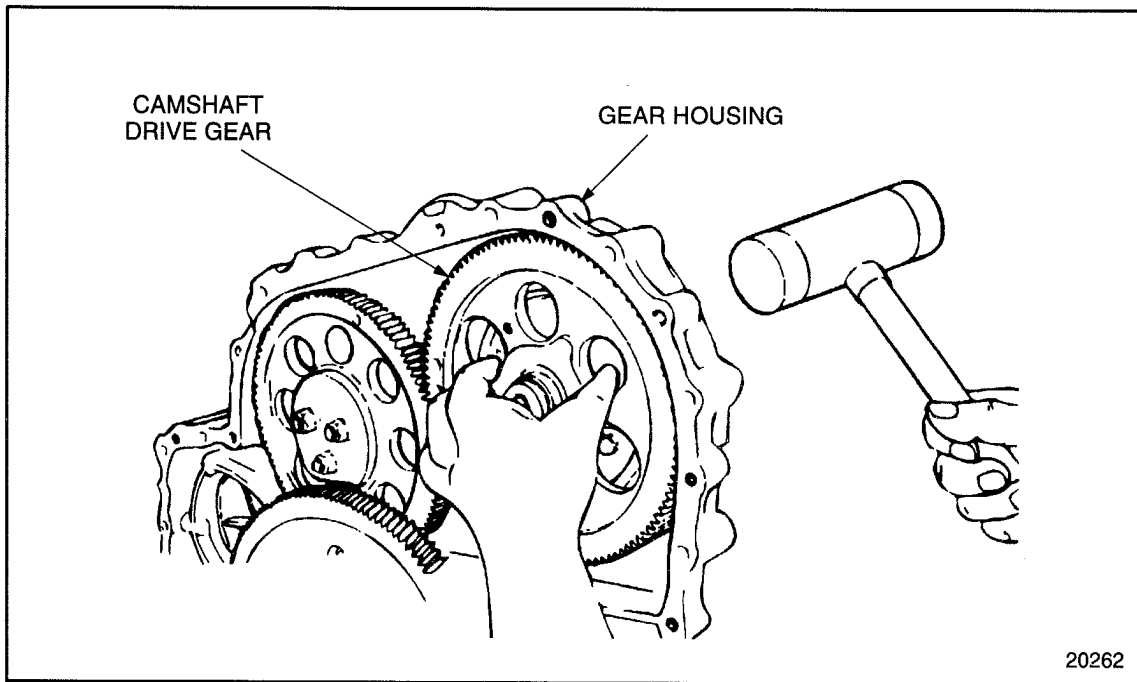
Removing Camshaft Thrust Plate Assembly
